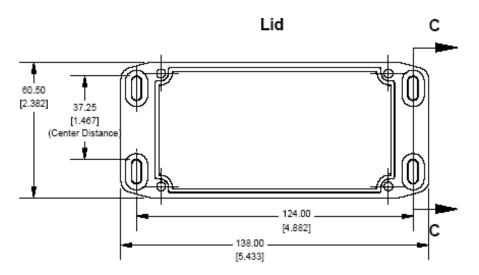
2405/2407LTA Mounting Hole Centers and Dimensions – mm [in]
